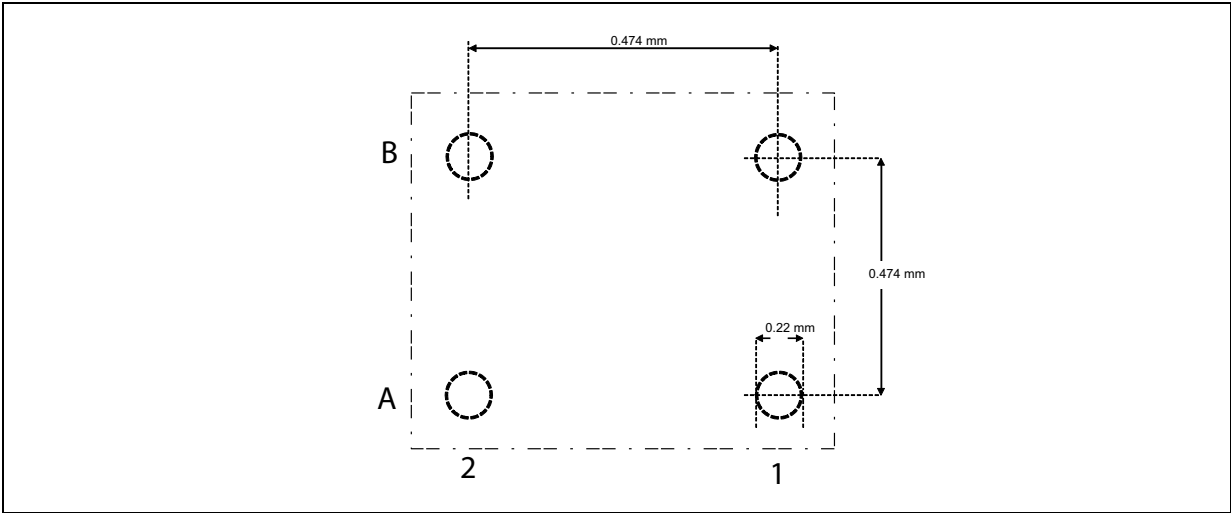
Footprint - 3 mils stencil - non solder mask defined
